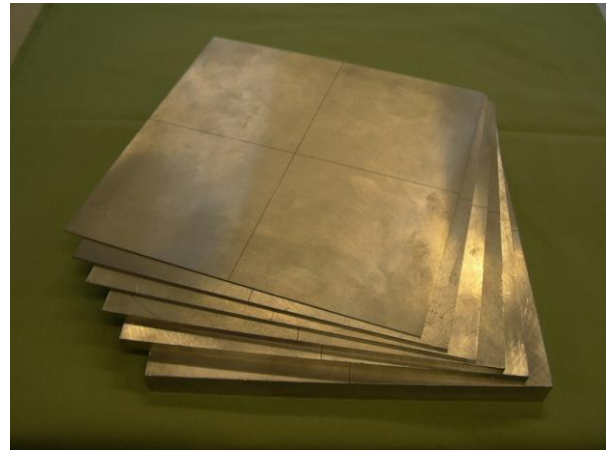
Machining a sheet of sprayed Wood's alloy to the required thicknesses *Figure 9.11 Complete set of sheets produced for transmission measurements
